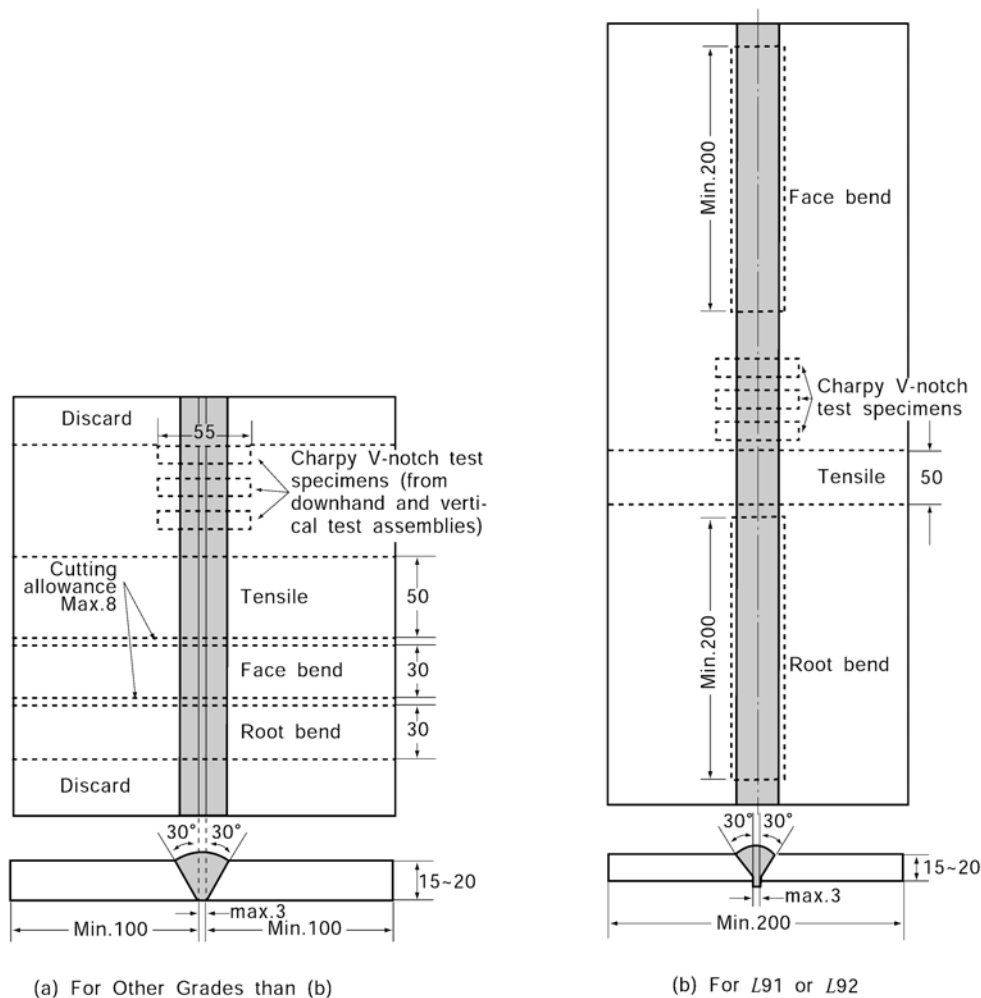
Butt weld Test Assembly for Electrode for Manual Arc Welding (Unit: mm)
